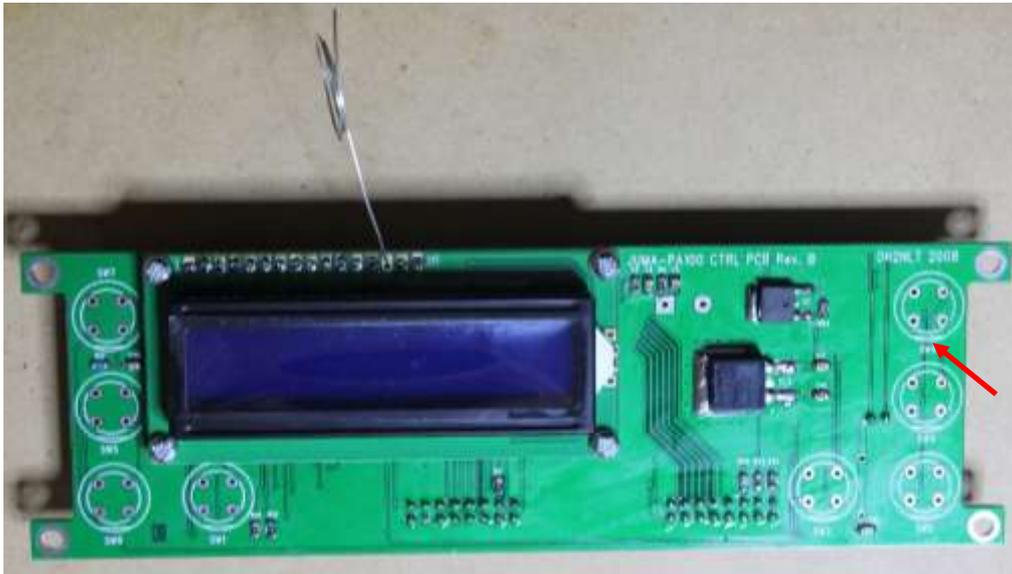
Digital Control Board – Front View with LCD display in place – last pin being soldered.
